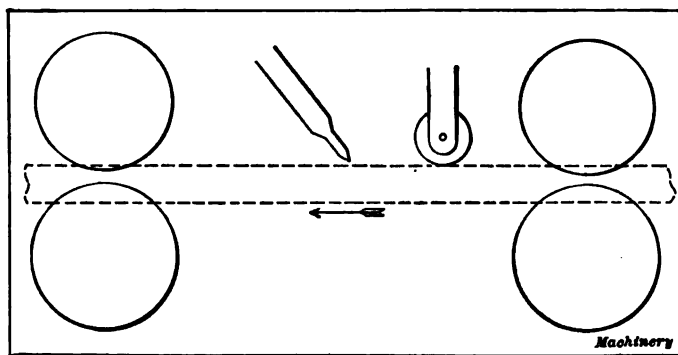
Principle of Autogenous Tube-welding Machine
